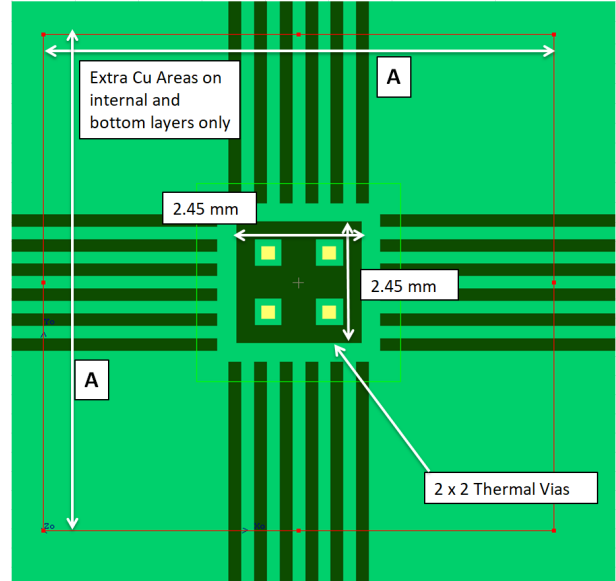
PCB - Top Layer (4/2-Layer PCB) for VQFN Package
